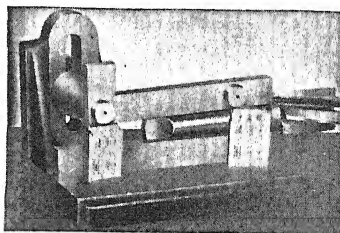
Johansson Gage Blocks Used in Setting Up a Taft-Pierce Sine Bar on the Sine Bar Fixture for Measuring the Taper of an End Mill.
